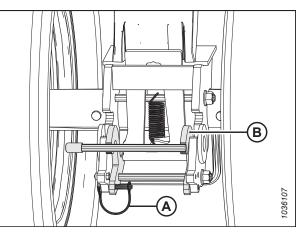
Left Transport Wheels – Rotation Lock Latch Engaged
